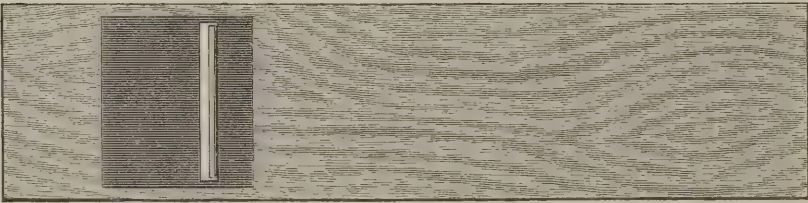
Self-Setting Plane.—Bottom View of Plane.
